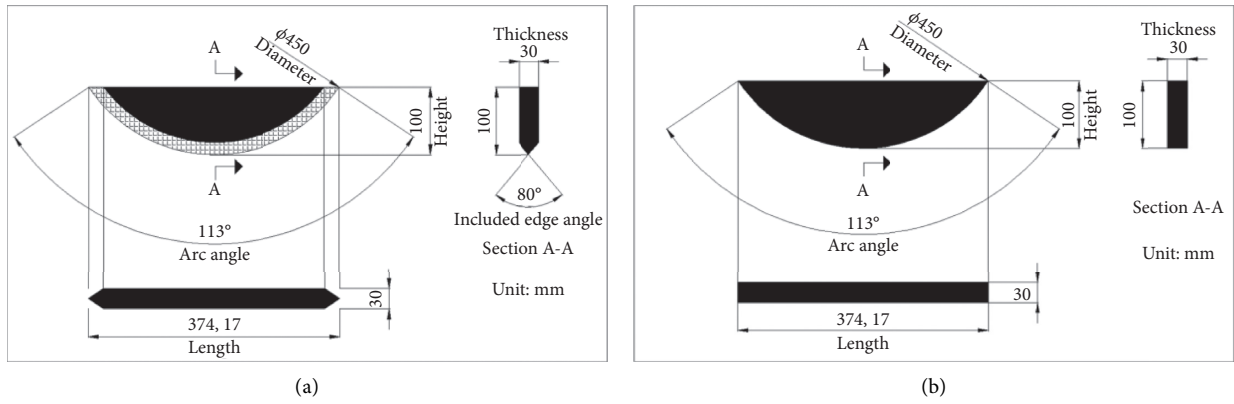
Fabricating drawings of the designed cutters: the V shape one (a) and CCS one (b).
